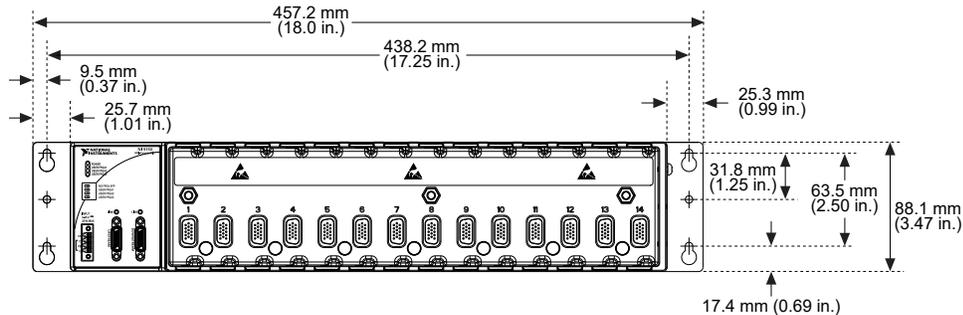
Dimensions of NI-9157/9159 with Panel Mounting Plate Installed
